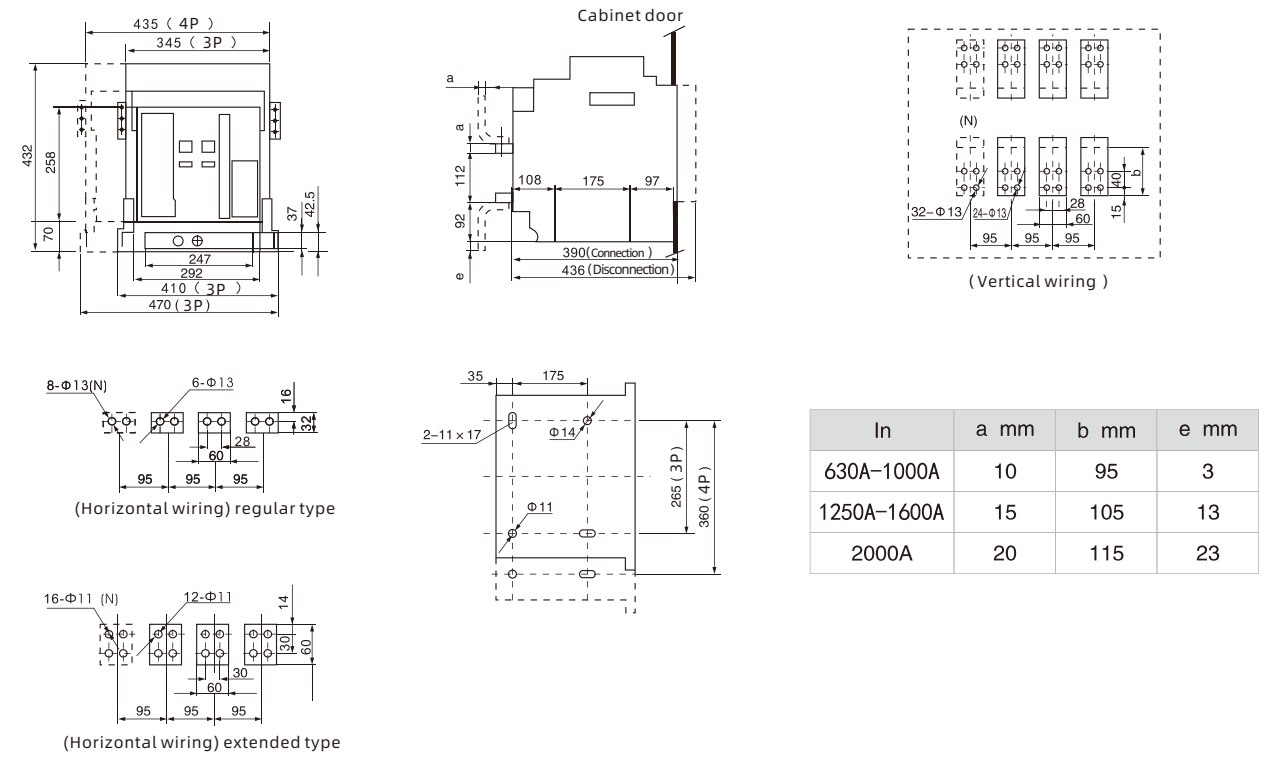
Draw-out circuit breaker overall and installation dimensions (ARW1-2000, 2000/4)
